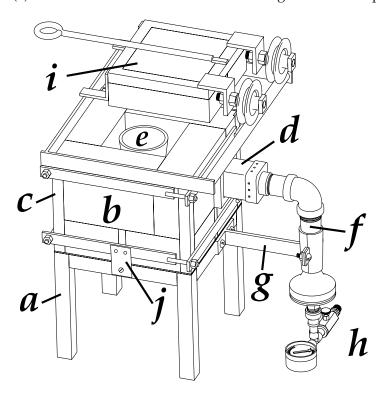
The parts of the furnace: base with legs (a), the furnace body (b), the upper frame (c), the burner head (d), the crucible (e), the Ransome V100 venturi (f), the burner brace (g), the needle valve and gauge (h), the furnace door (i), and lastly, the positioning tab (j)
